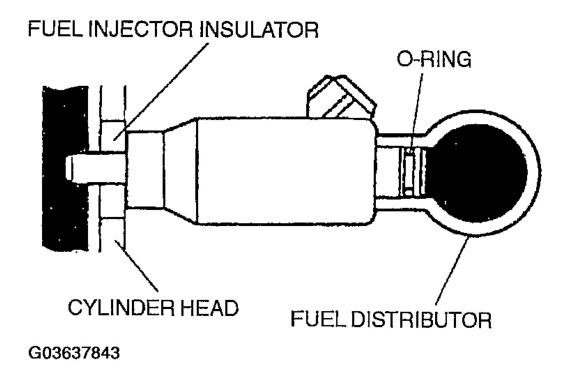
Identifying Fuel Injector Insulator Courtesy of MAZDA MOTORS CORP.
